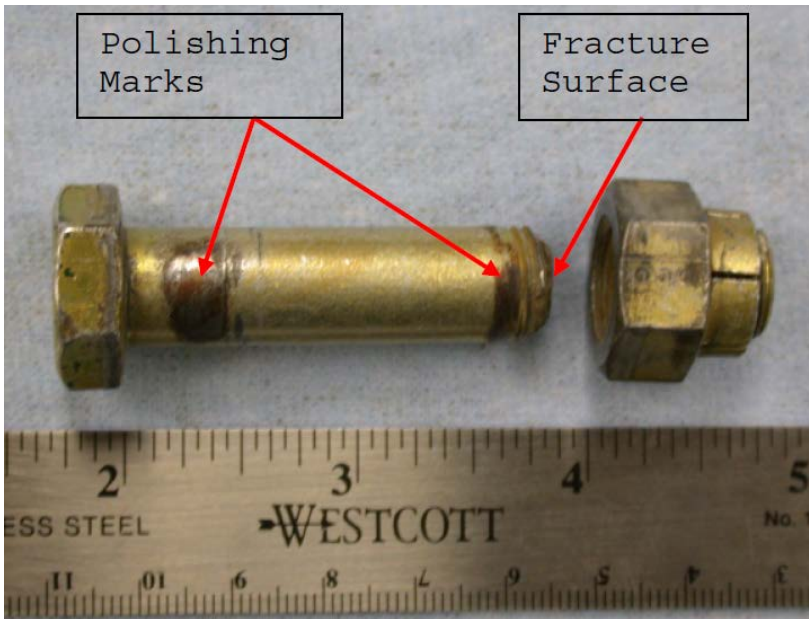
Polishing Marks and Fracture Surface on Broken Bolt, Found in 2006
